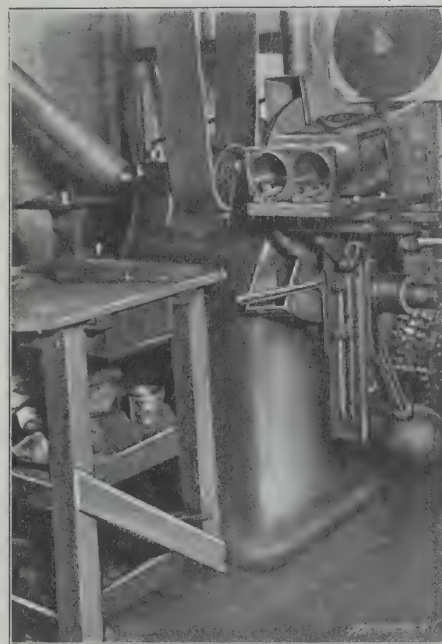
Finishing Seats for Water Jacket Cover on a Besly Disk Grinder
